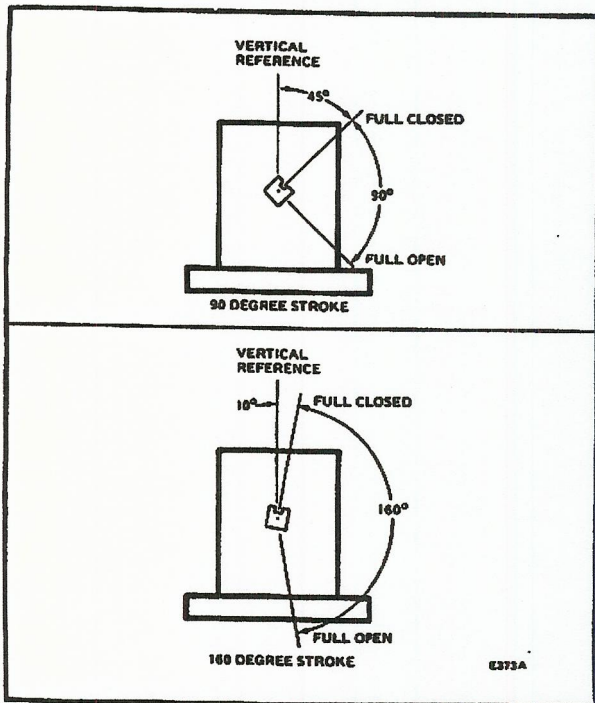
MOTOR SHAFT POSITION AT ROTATIONAL LIMITS (as viewed from the power end of the motor).
